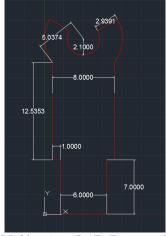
Gear Holder AutoCAD Drawing, Dimensions in mm
